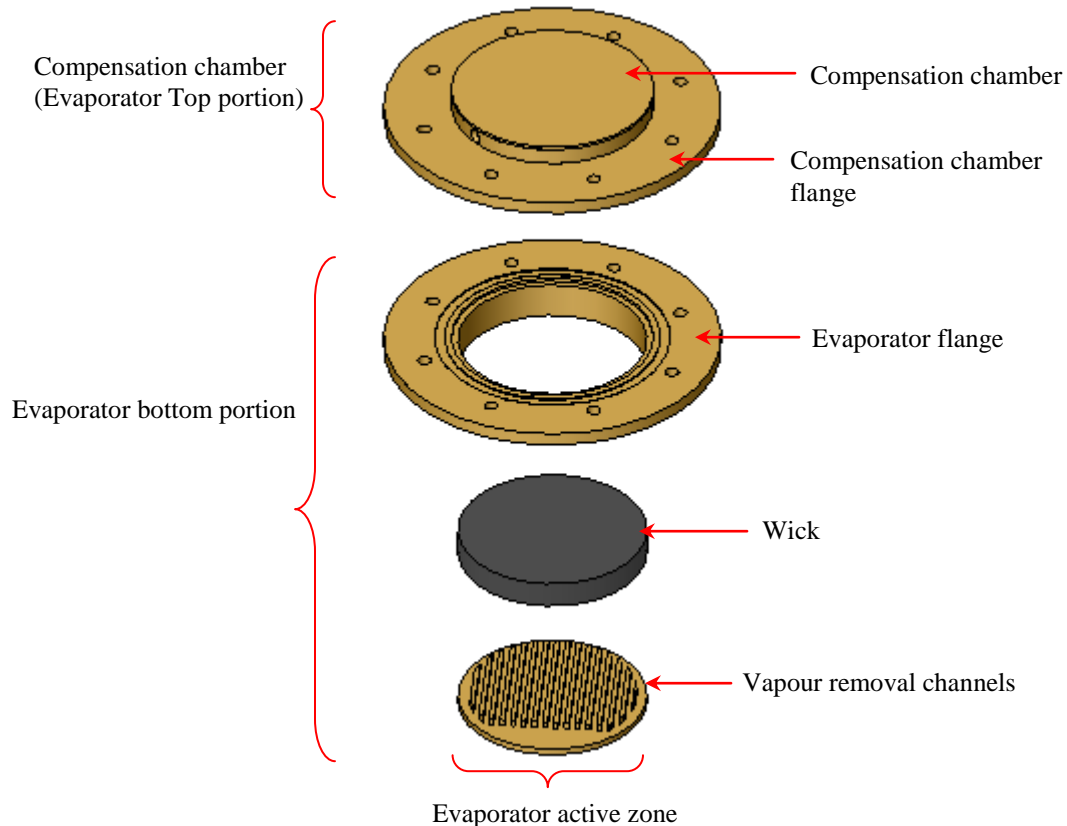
Exploded view of the capillary evaporator showing the different parts
